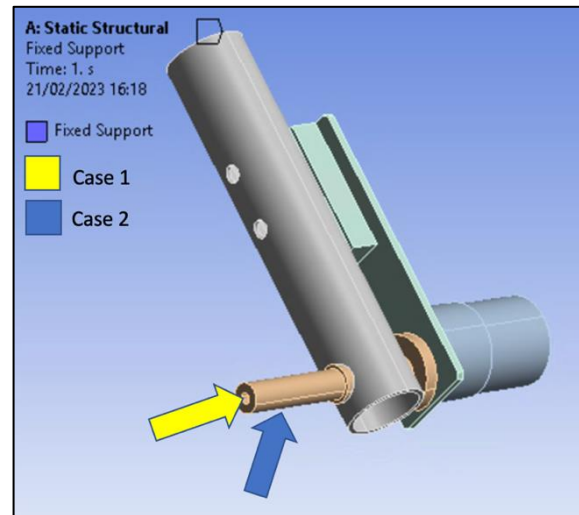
Detailed Breakdown of Rear Wheel Assembly Loads
